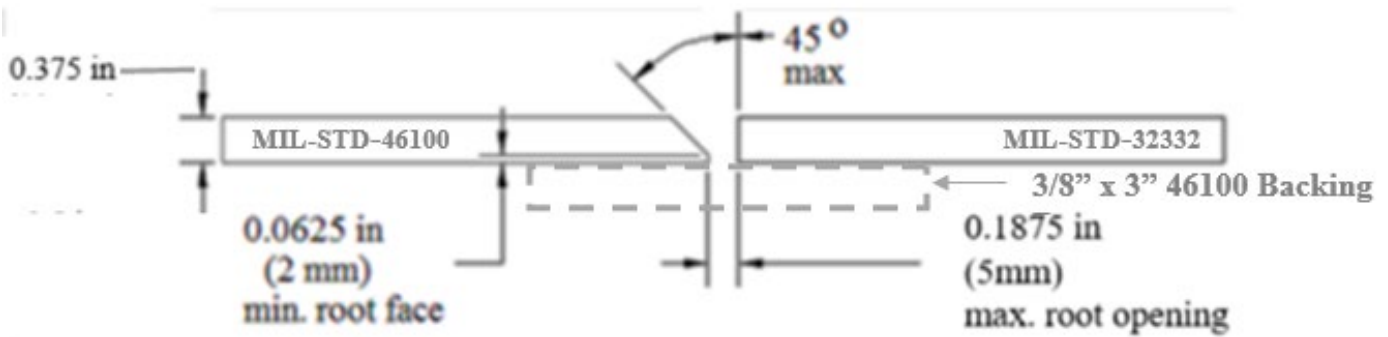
, Sketch that illustrates the weld joint type, dimensions and tolerances. The weld was completed in the 2G position with a backing bar.
